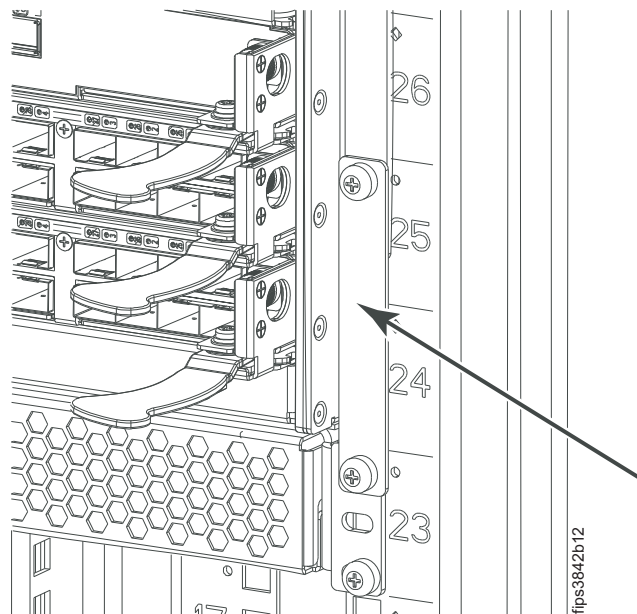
Lower right 2499-416 FIPS bracket installation (detailed port side view)
